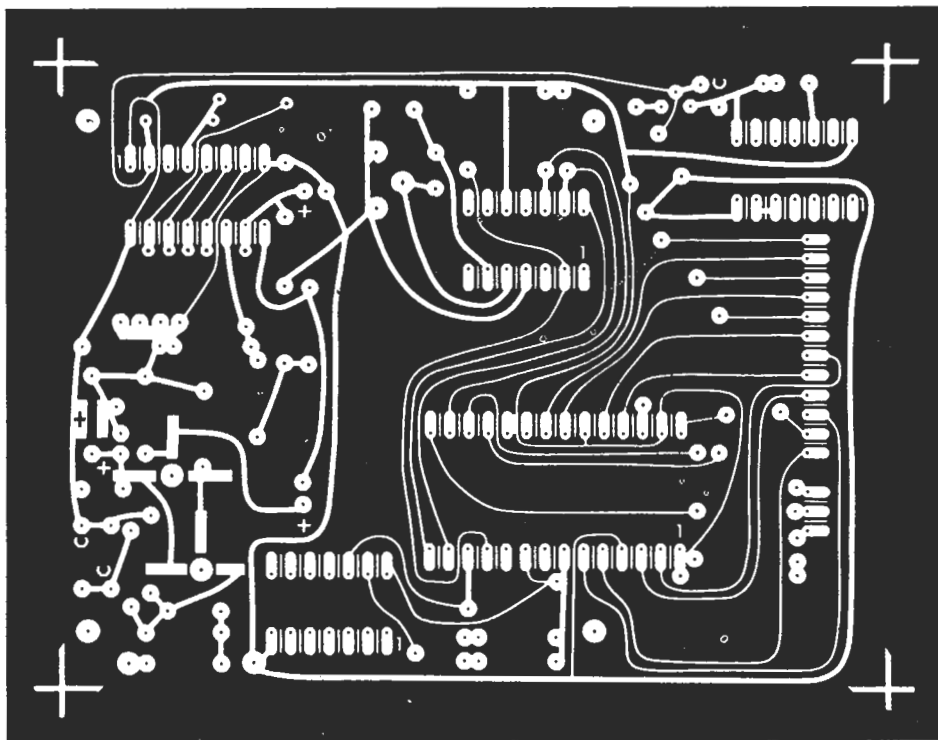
Etching and drilling guide for pc board (left) and component layout (above).
